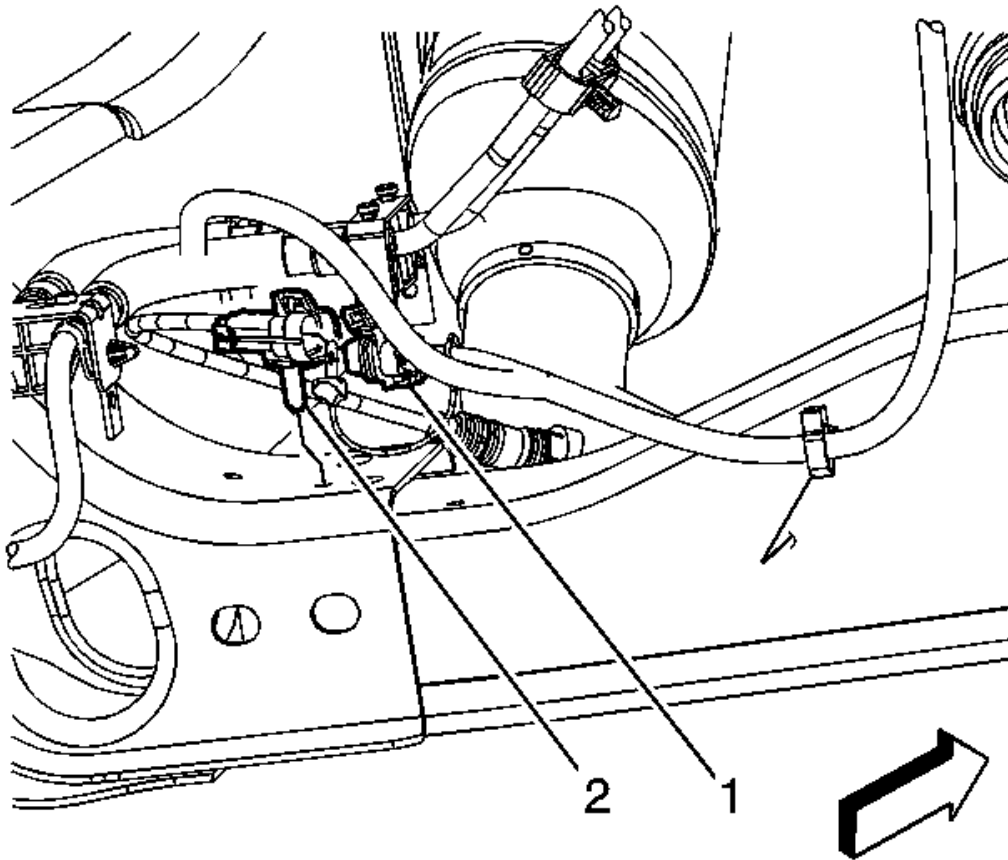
View Of Engine Wiring Harness Electrical Connector & HO2S Electrical Connector
